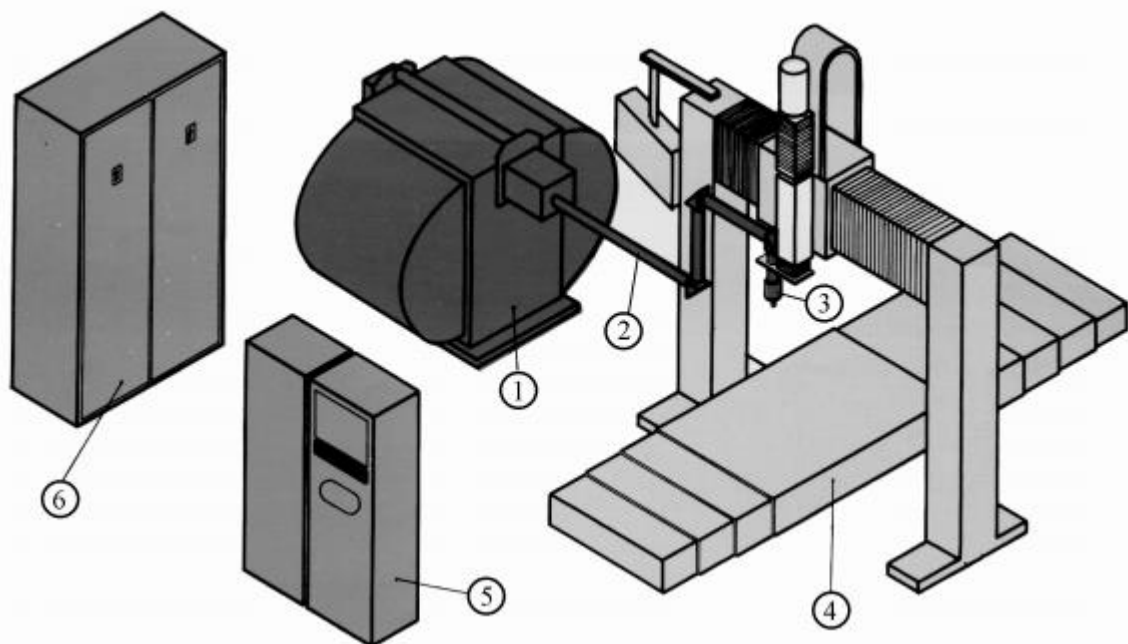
Laser processing machine components: 1-laser source; 2-laser beam delivery; 3-cutting head; 4-work table axis of motion; 5-control unit; 6-power supply unit.
